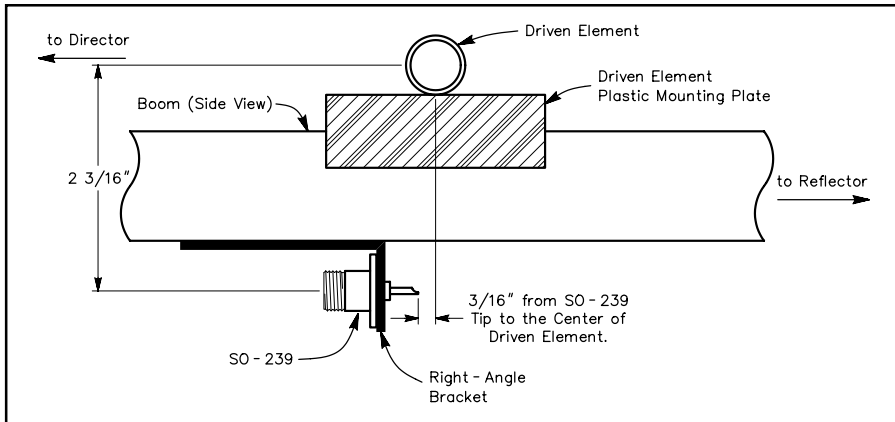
Side view of the driven-element area and SO-239 mounting bracket.
